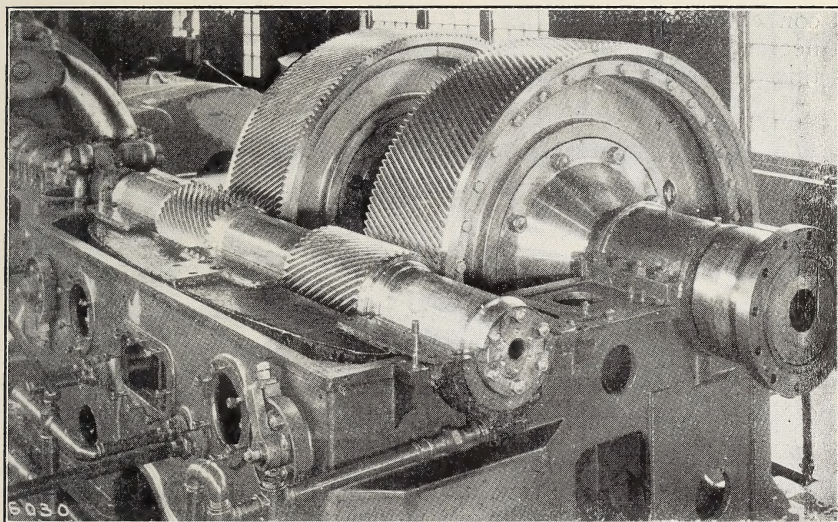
Photo of Gear with Cover and Upper Half of Floating Frame Removed to Expose Pinion and Gear.
